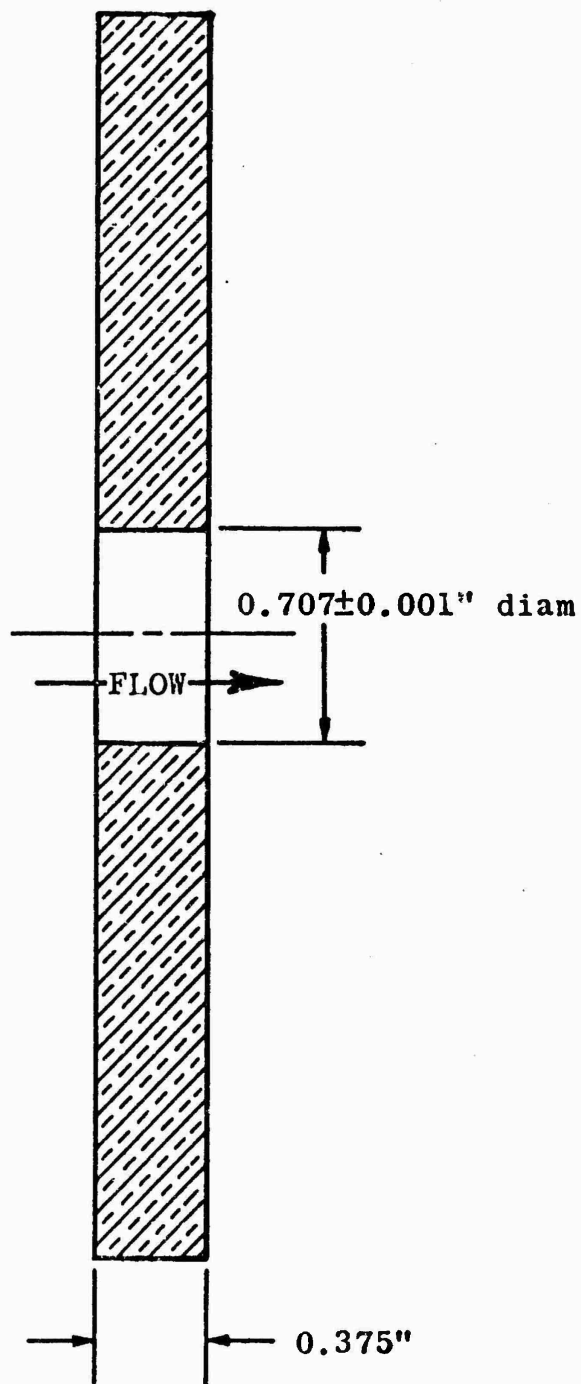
0.707 INCH DIAMETER SHARP EDGE NOZZLE.
